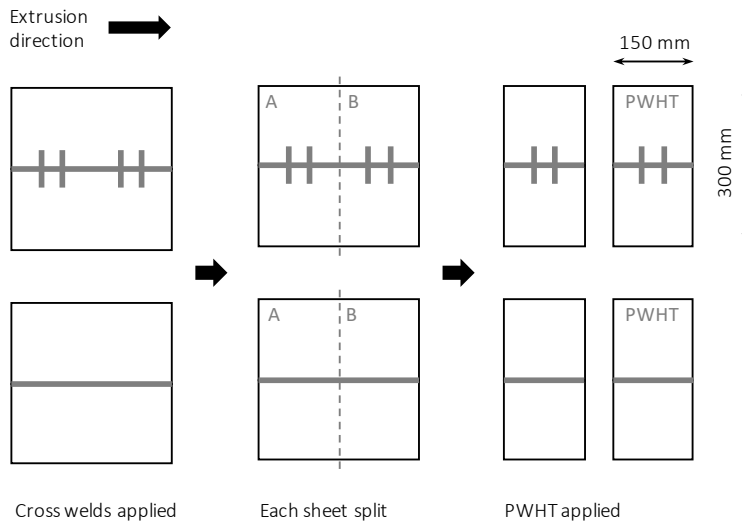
Illustration showing the process of applying the cross welds and PWHT.
